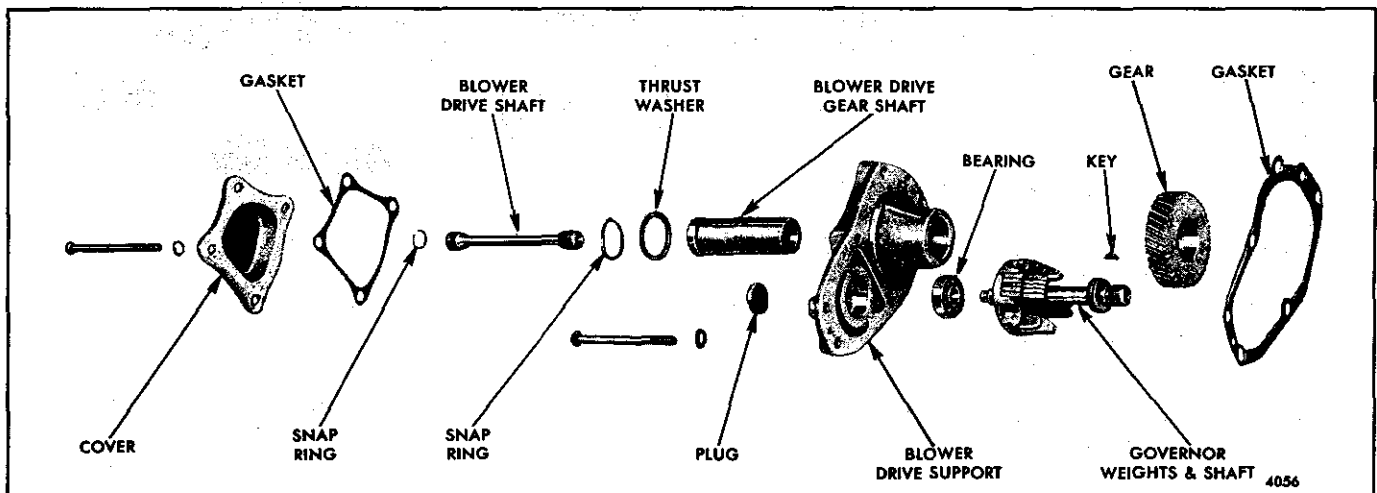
Blower Drive Support Assembly Details and Relative Location of Parts
